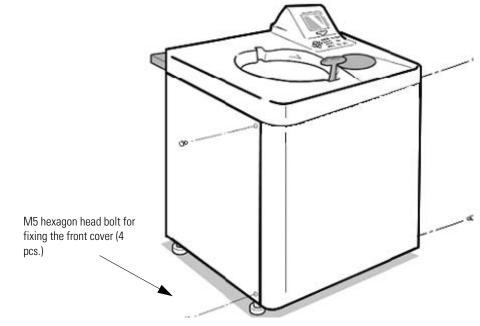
Installing the front cover (7) Turn on the power breaker.
